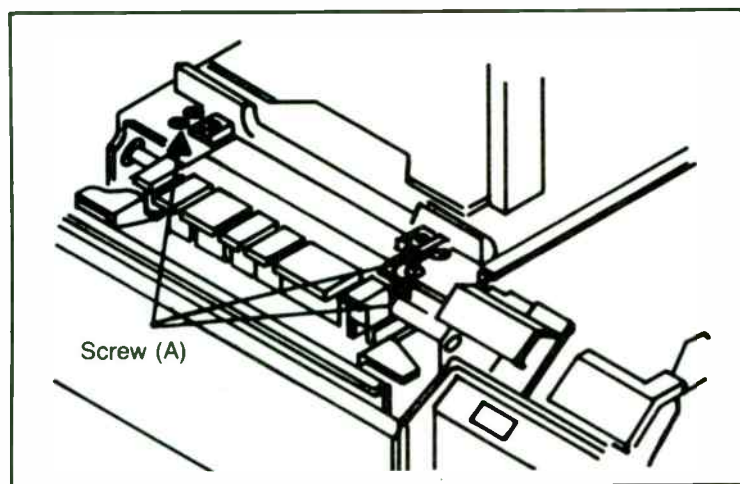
Cassette up holder position adjustment (courtesy of Magnavox).
